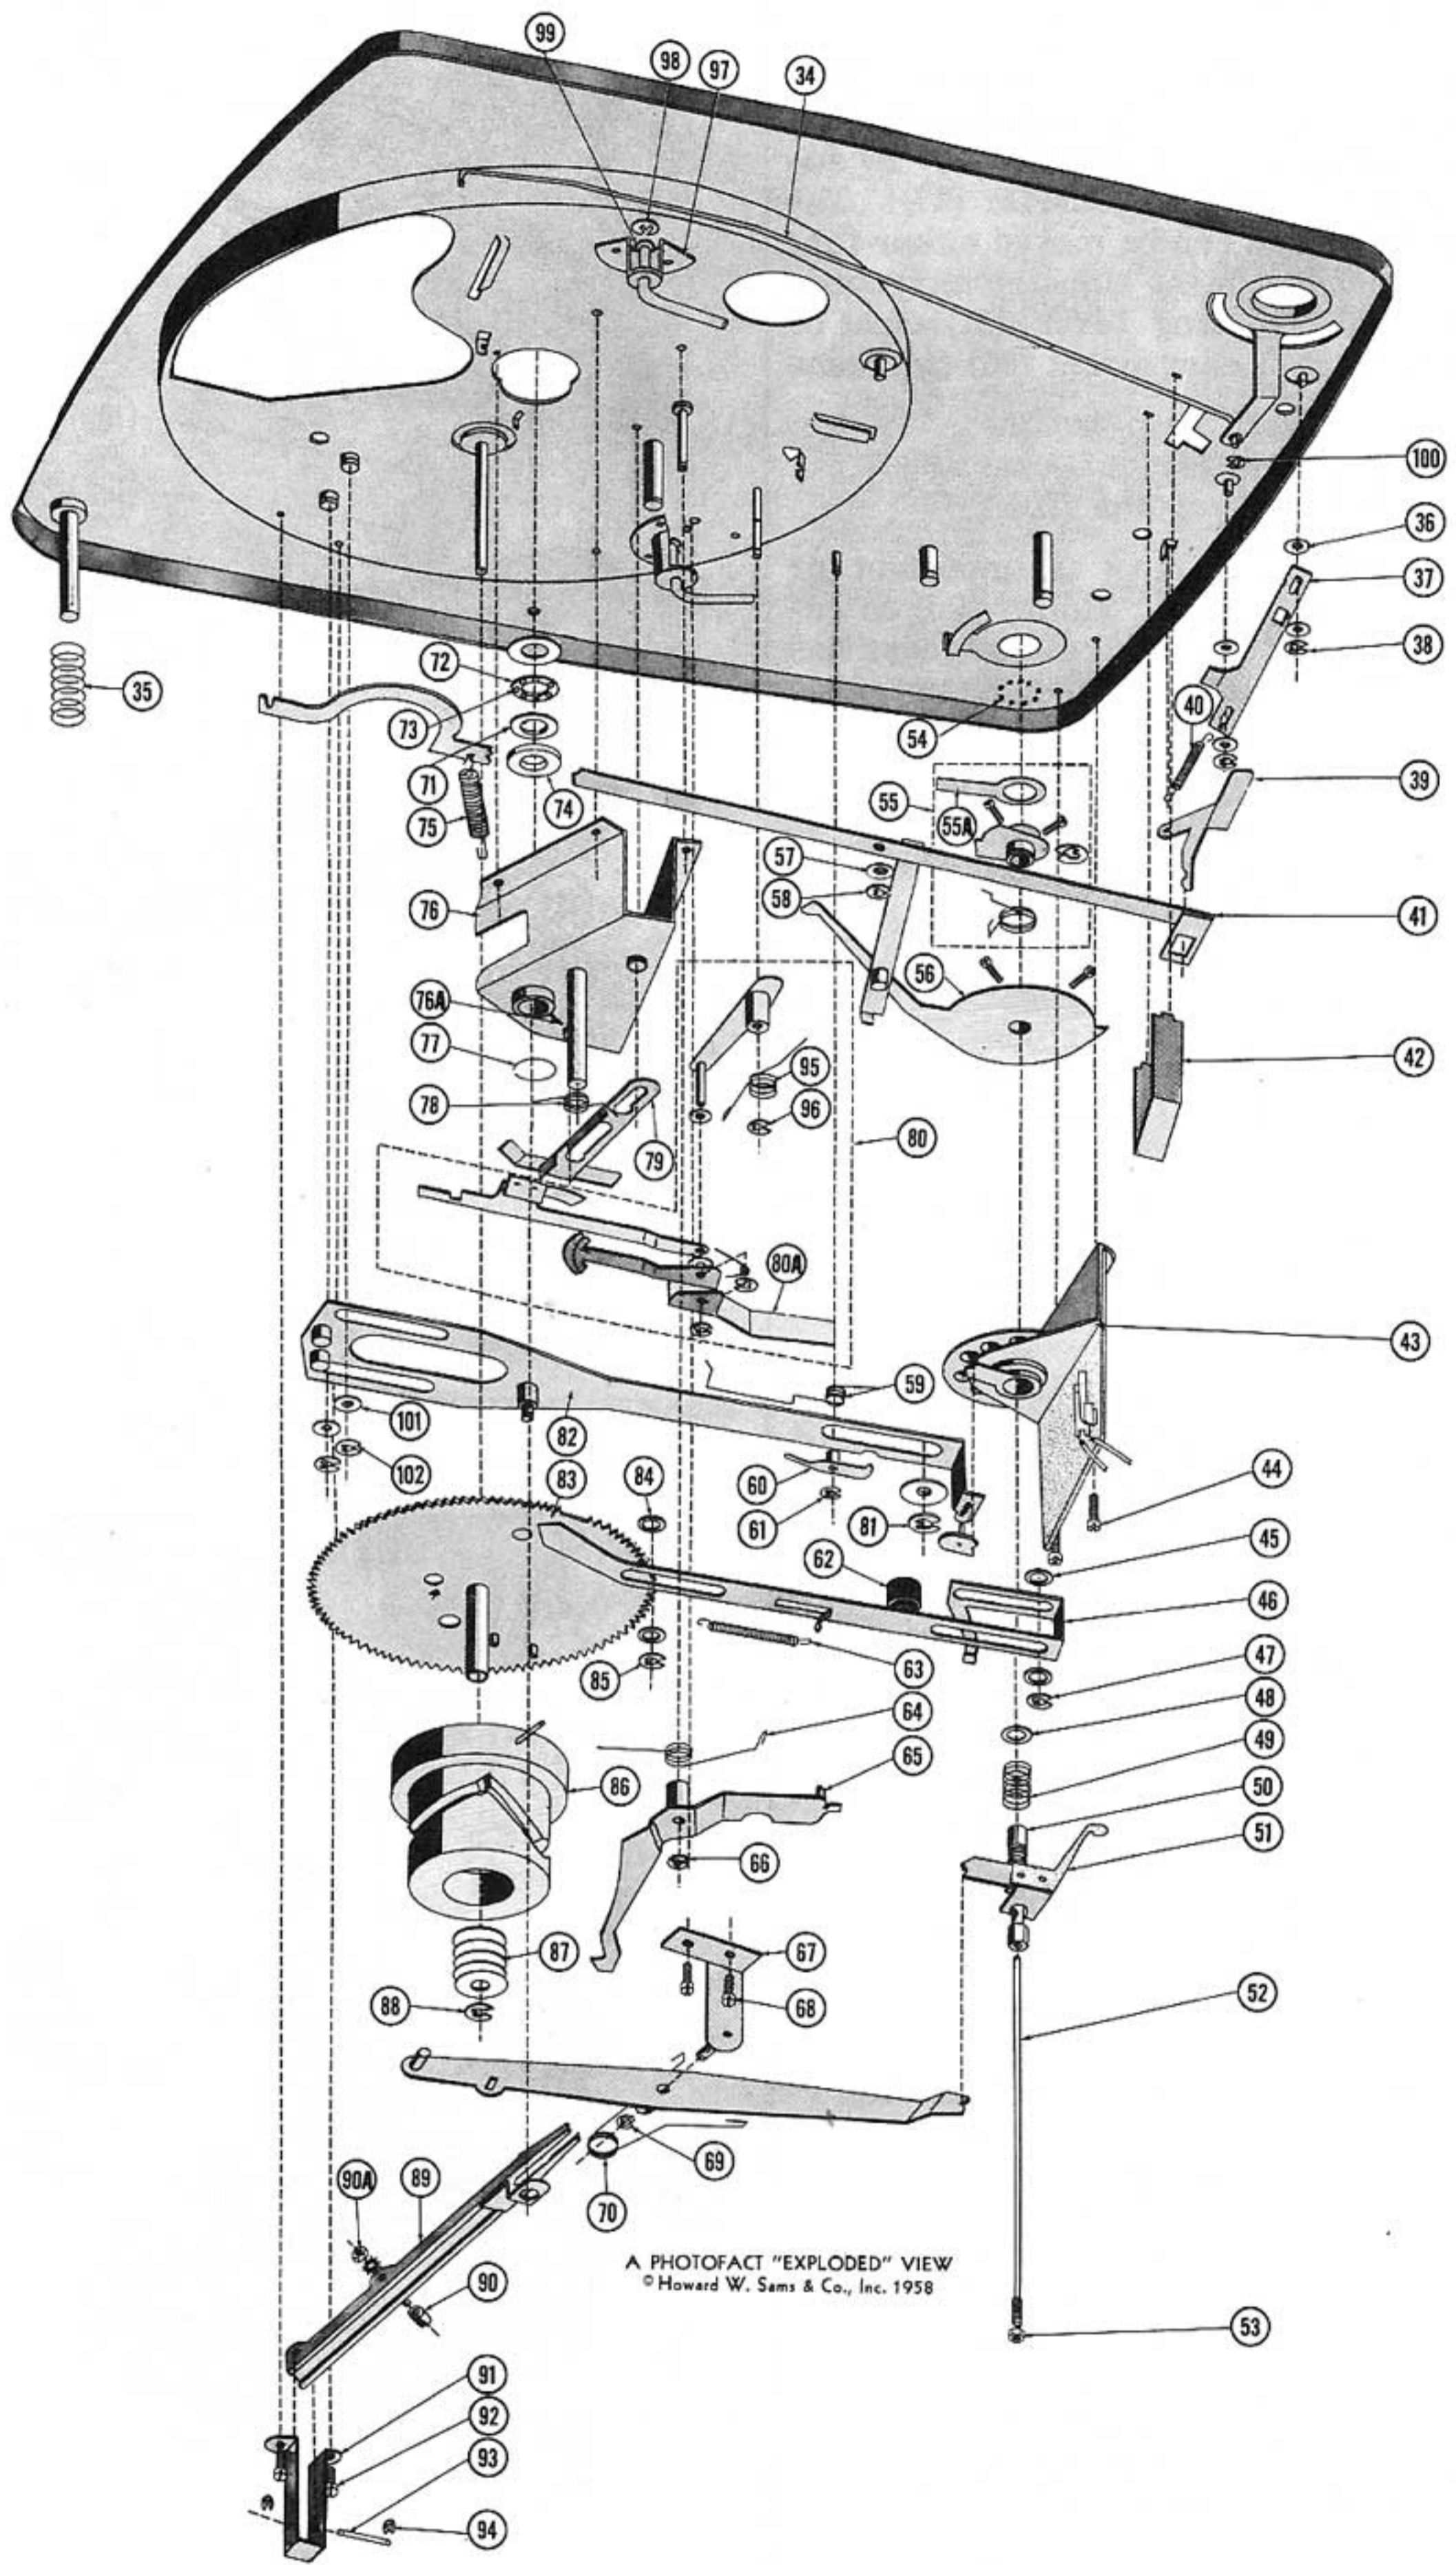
B EXPLODED VIEW OF PARTS BELOW BASEPLATE
